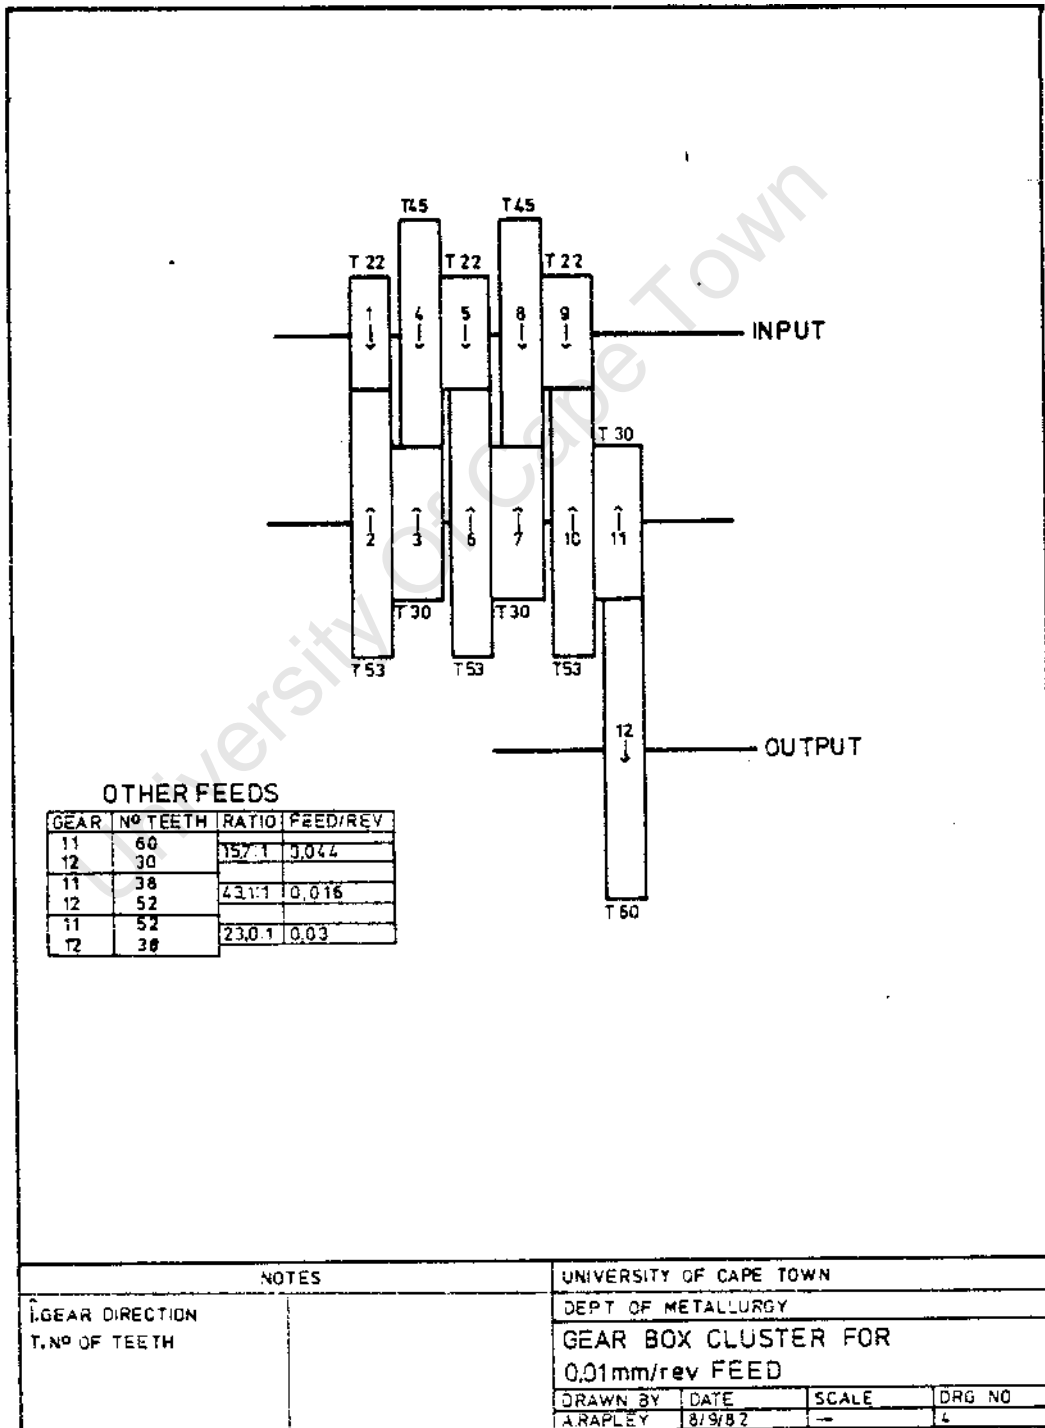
Diagram of the redesigned gear cluster assembly
